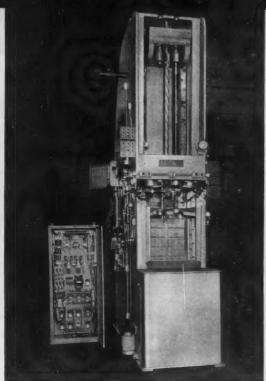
Lapointe vertical pull-up machine equipped for internal spiral broaching
